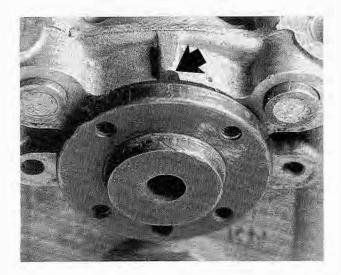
Notch in camshaft flange aligned with mark on cylinder head (arrow).
